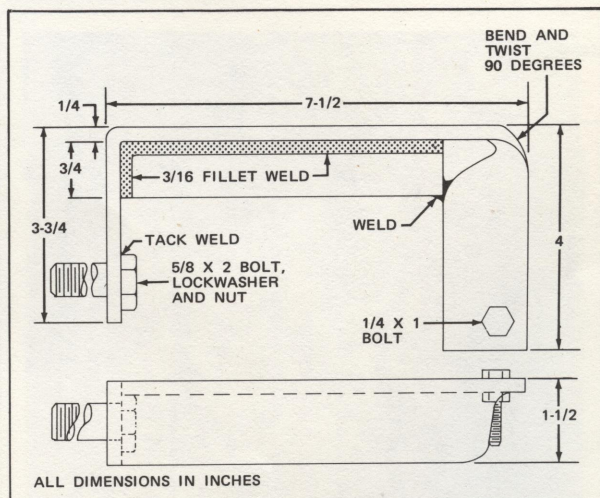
INDICATOR HOLDING FIXTURE FOR ALIGNING THE ENGINE TO COMPRESSOR DRIVESHAFT.
